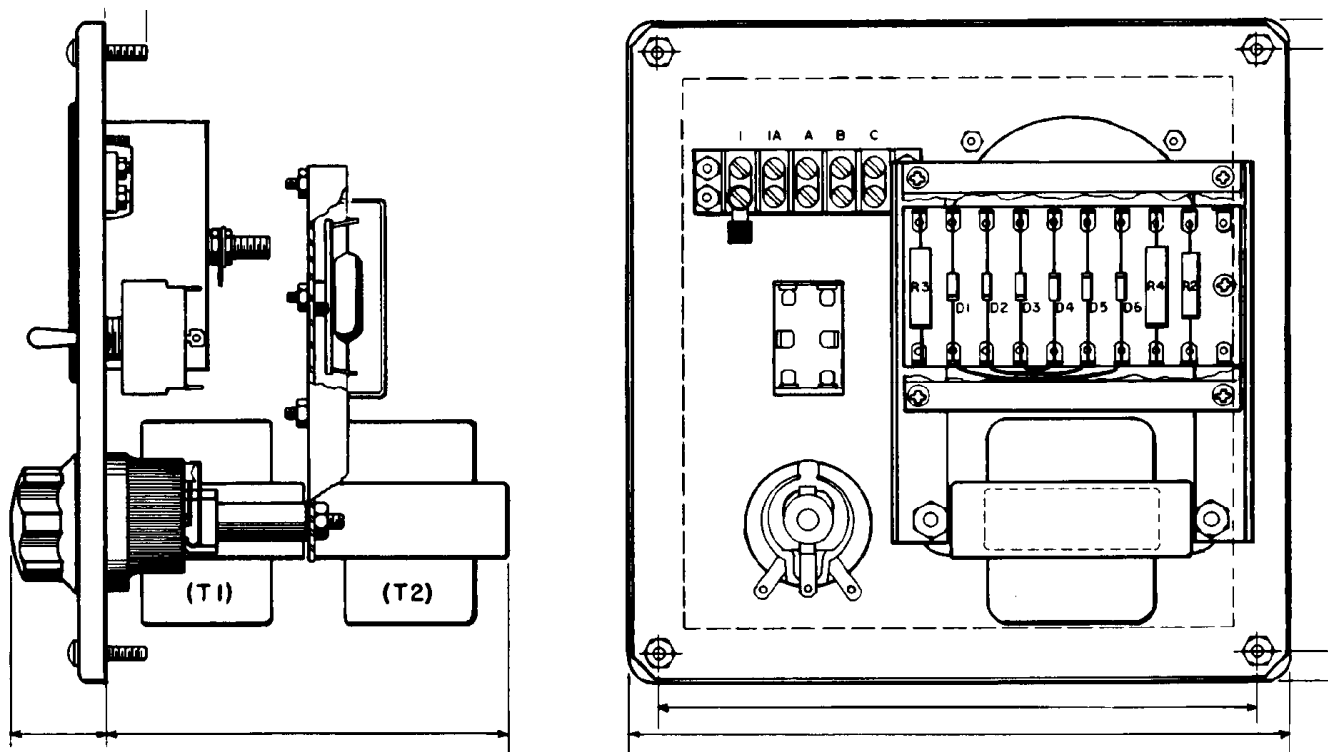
Outline Drawing of the LSG Power Transfer Control
